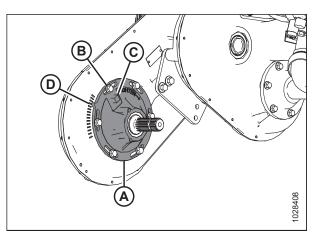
Completion Gearbox Chain Tensioner Cover
